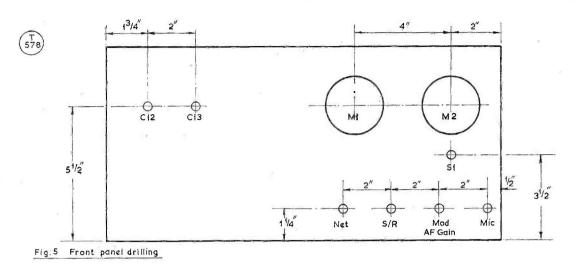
Front panel drilling plan, on a face of 13×8 in. 18g. aluminium sheet. Holes are $\frac{1}{2}$ in. dia. for normal controls. Other holes are cut to suit components used.
